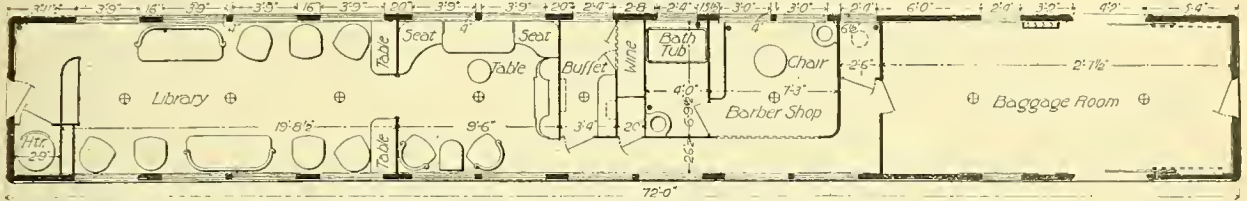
SECTIONAL PLAN OF COMBINATION BAGGAGE, BARBER SHOP, BATH ROOM AND LIBRARY CAR, COLUMBUS.
